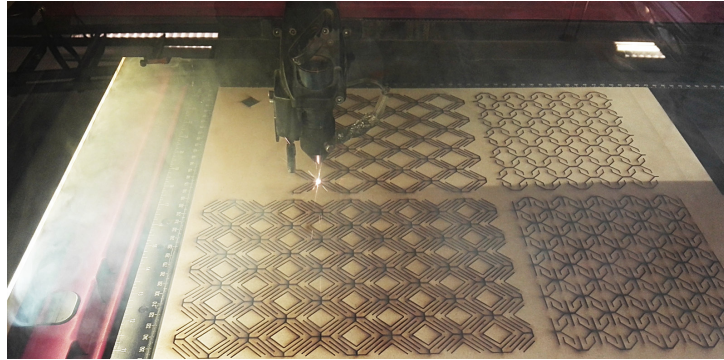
The making of flexure patterns out of a MDF plate on a laser cutter.
